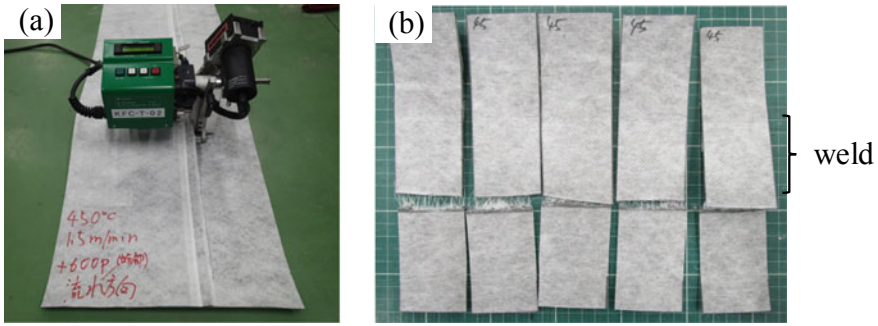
Photographs of a hot air welding test; b weld tensile test
